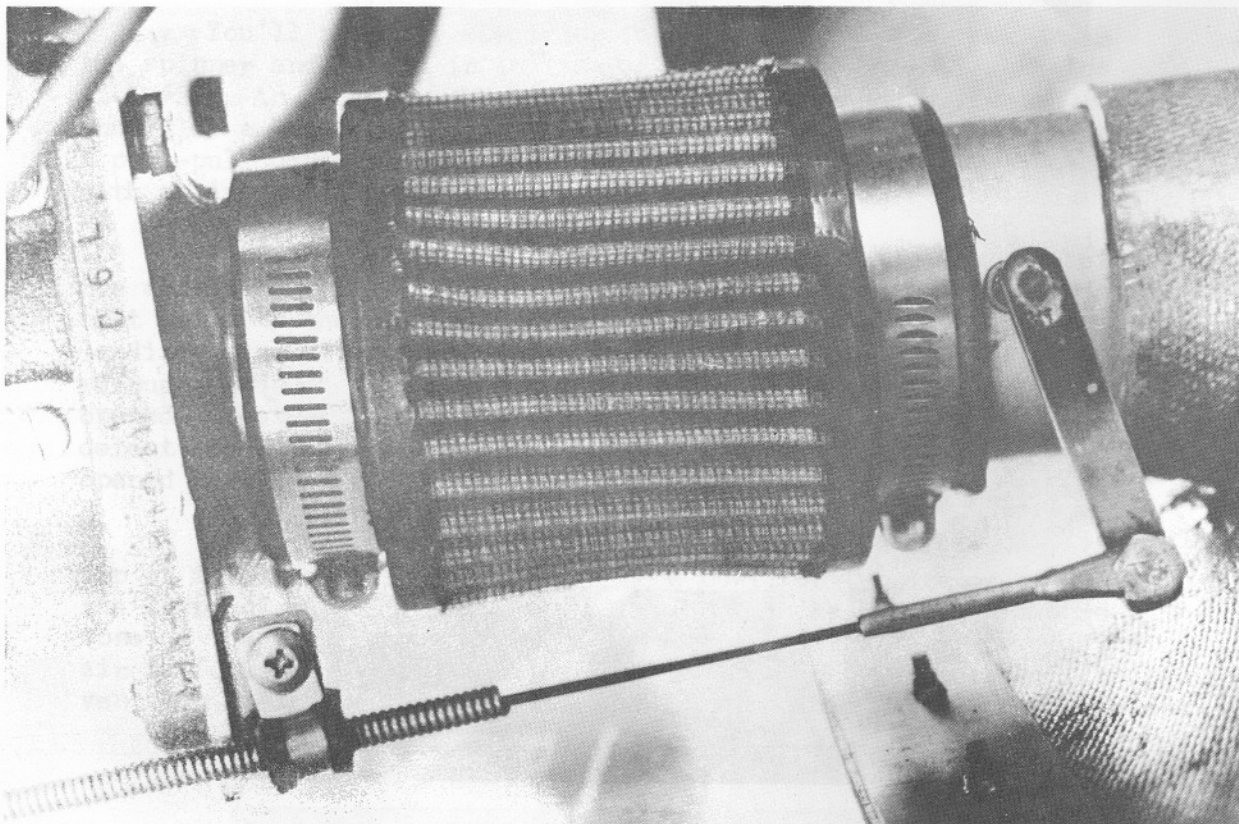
The butterfly valve operating lever is controlled by a push-pull cable leading to the rear cockpit. The air filter is clamped between the butterfly valve and the carburetor.
